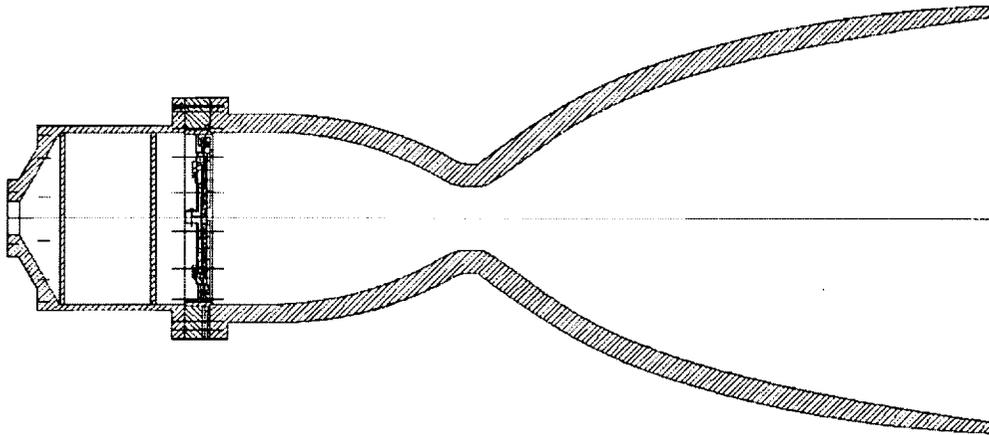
USFE Thrust Chamber Assembly. TCA consists of oxidizer dome, catalyst bed assembly, fuel injector, and ablative chamber/nozzle. The chamber produces 10,000 lbf of thrust in space at a chamber pressure of 500 psia with an expansion ratio of 40.
